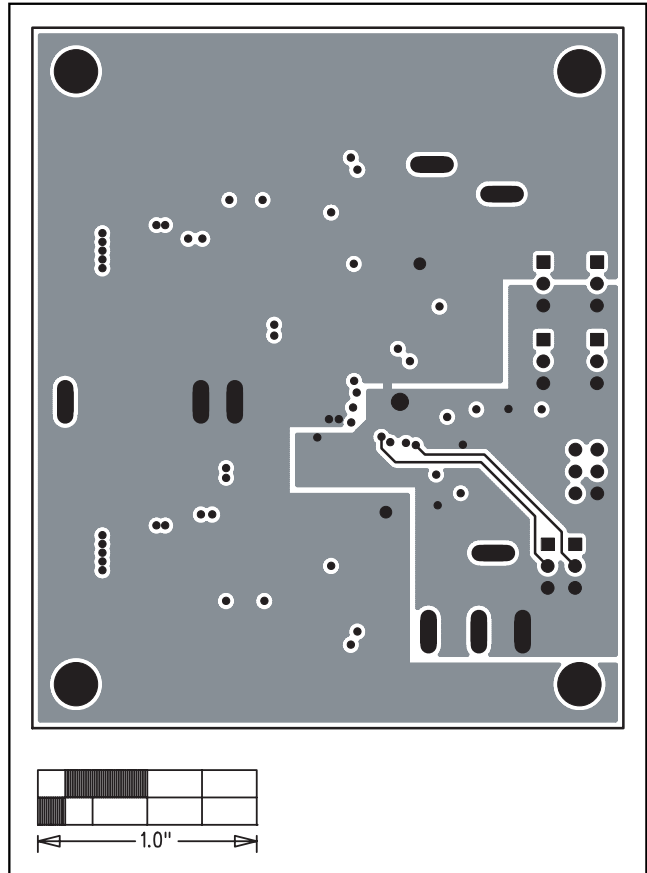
MAX1533 EV Kit PC Board Layout—Layer 3
